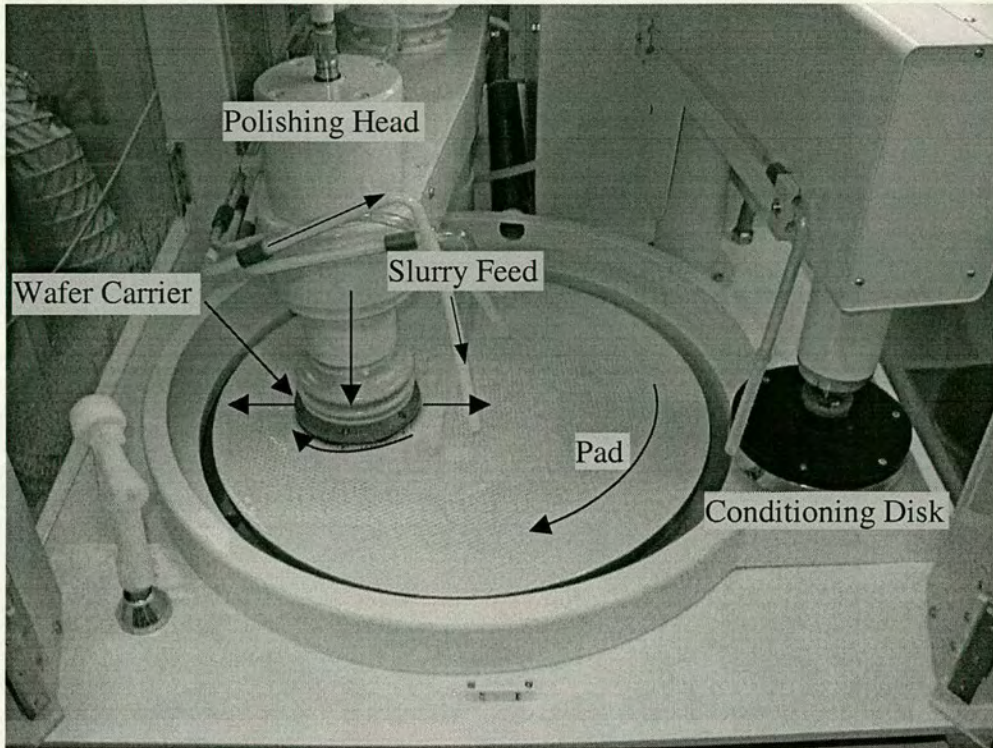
Photograph of Presi Mecapol E460 Polishing machine layout
